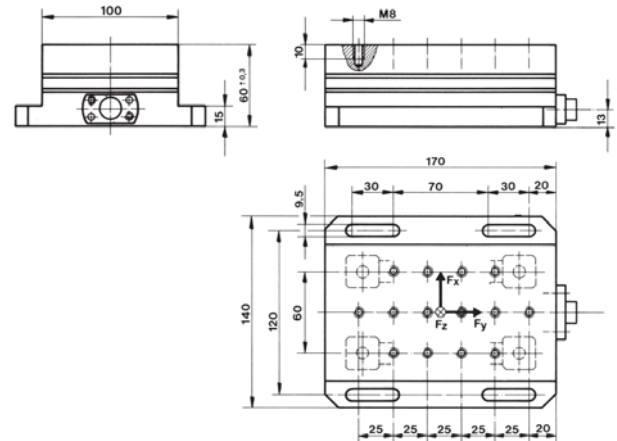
Dimensions and grip dimensions of the dynamometer KISTLER 9257B.
